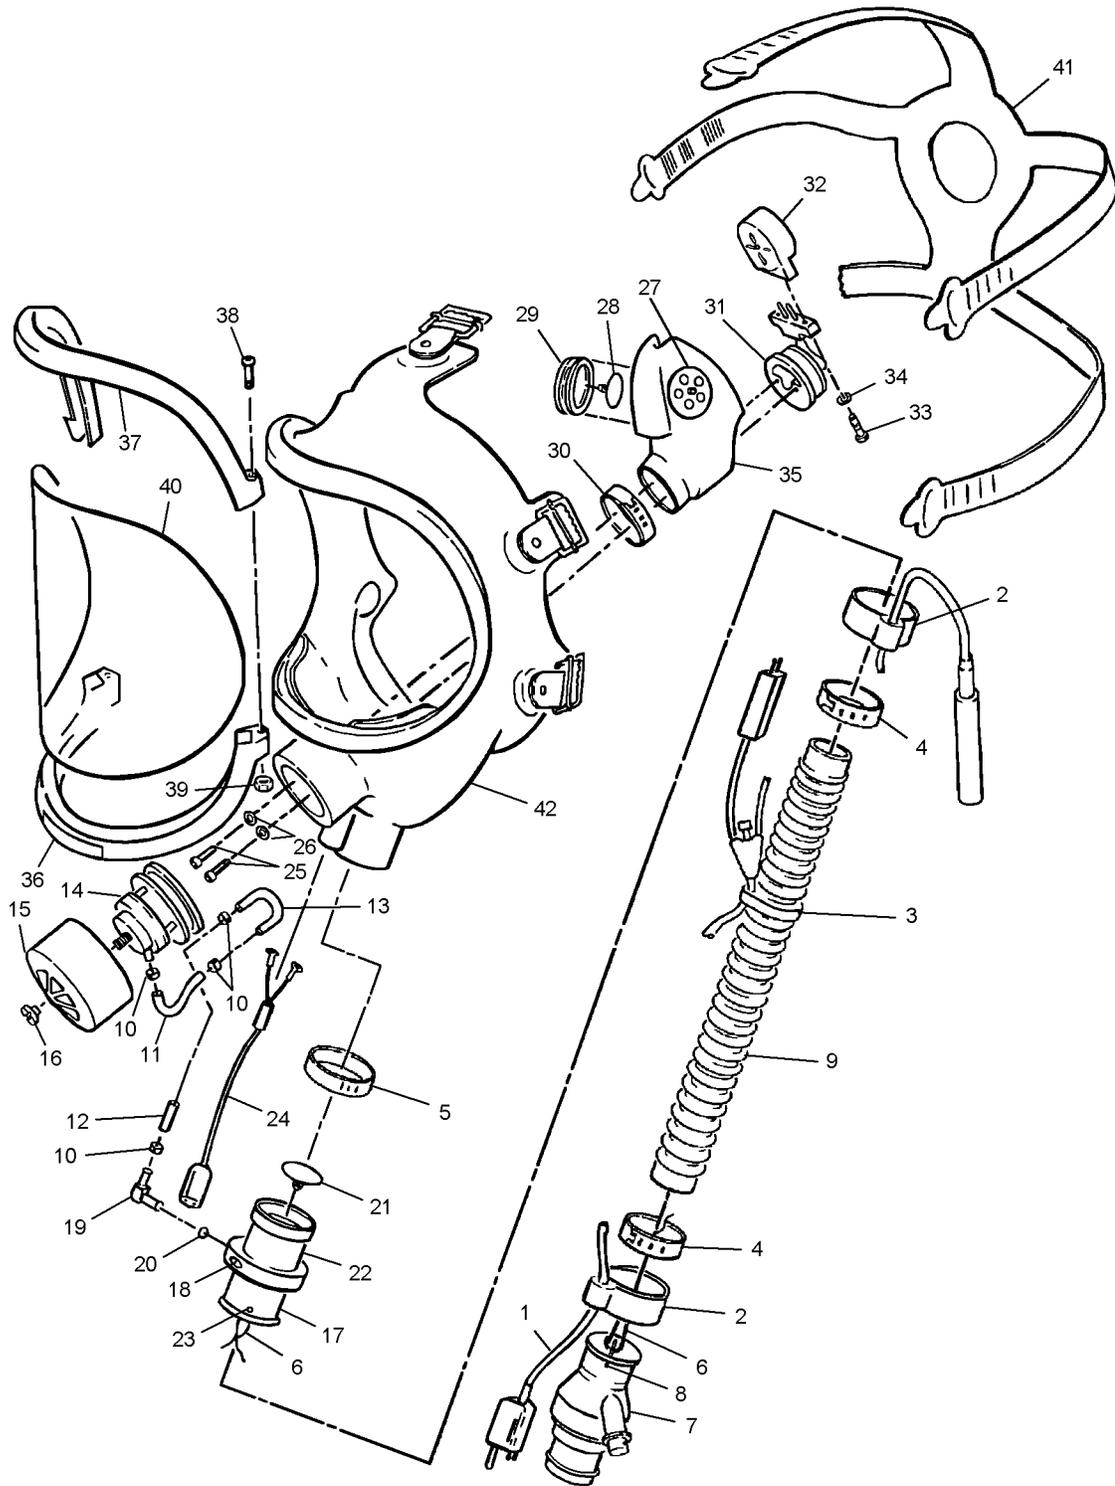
Full-Face Oxygen and Smoke Mask Assembly (P/N 651-469), IPB
